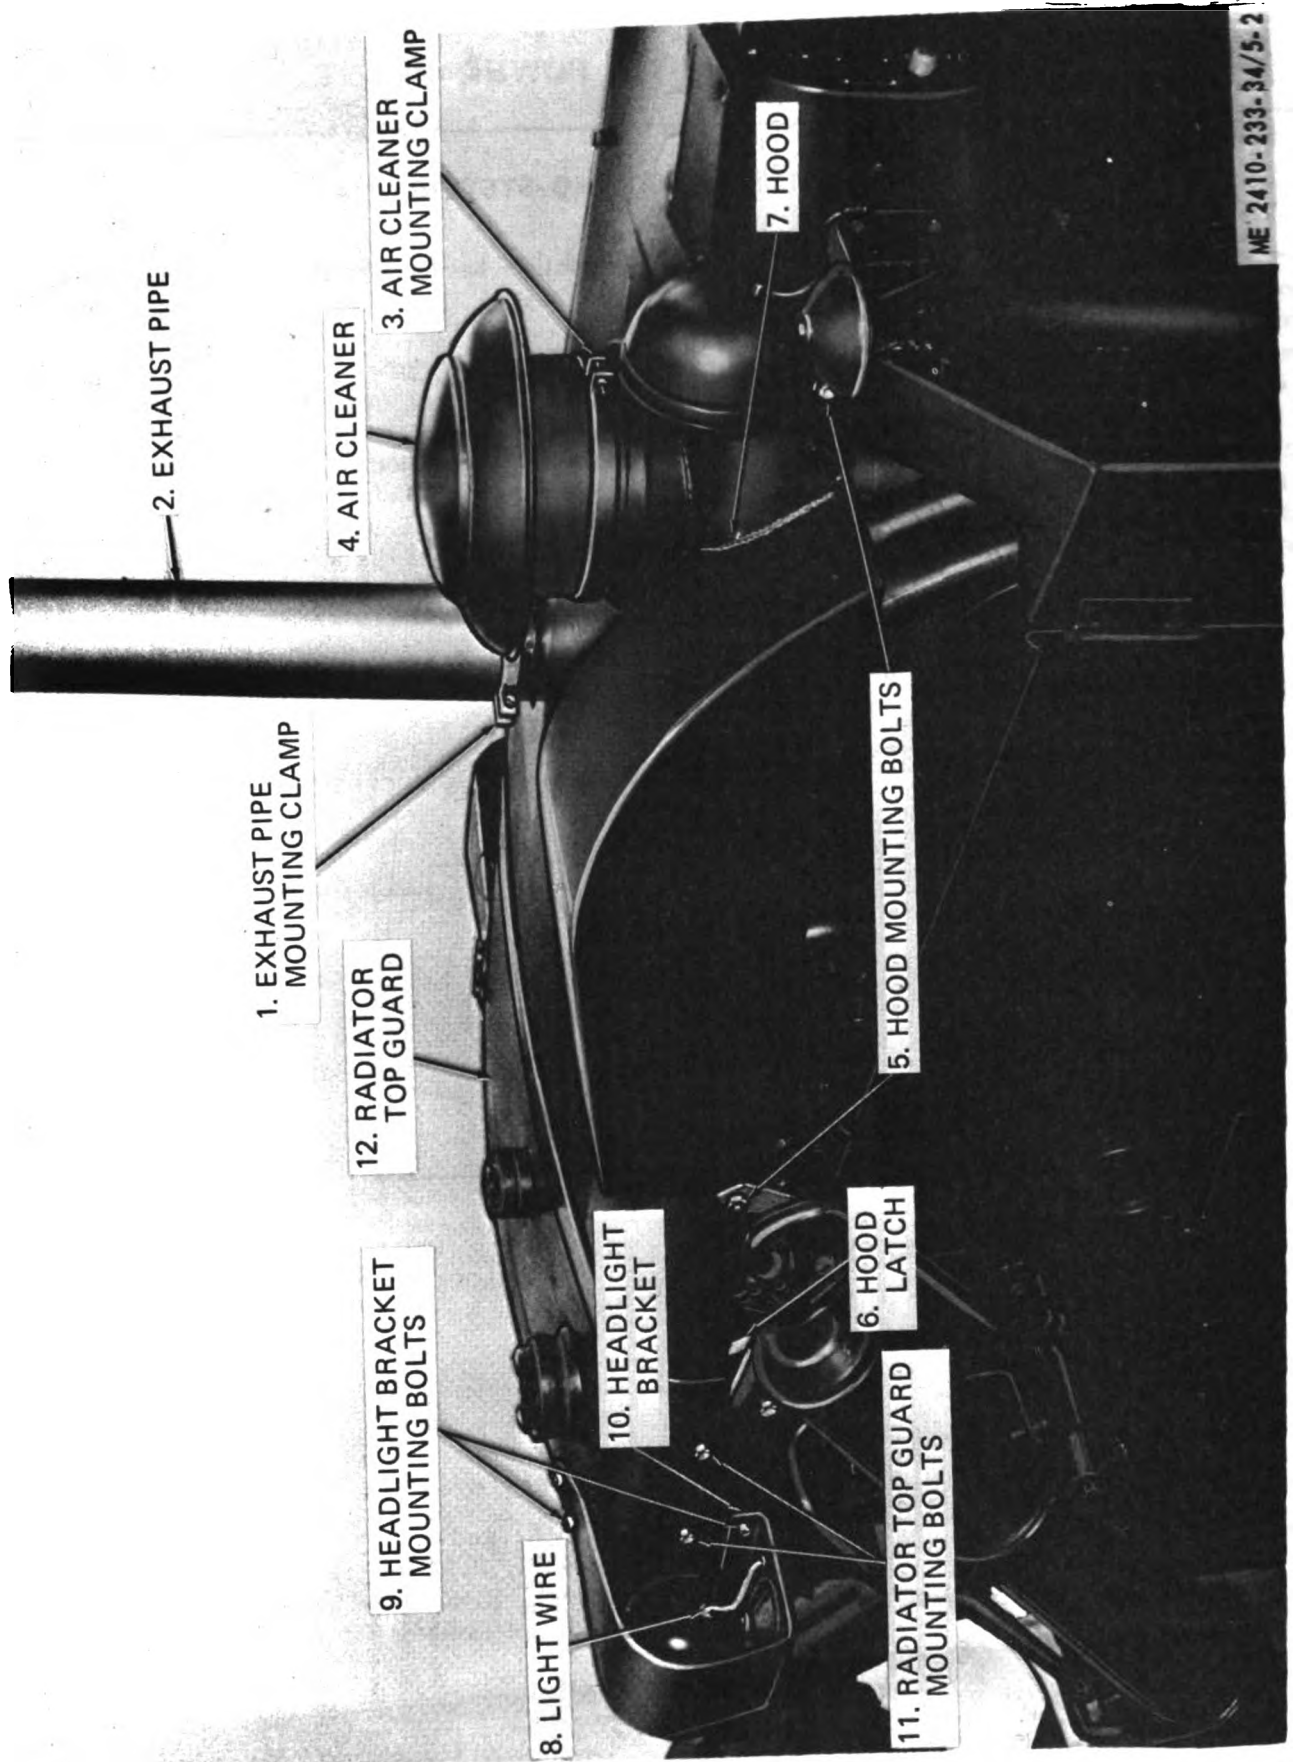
Hood, headlight brackets and radiator top guard, removal and installation.
